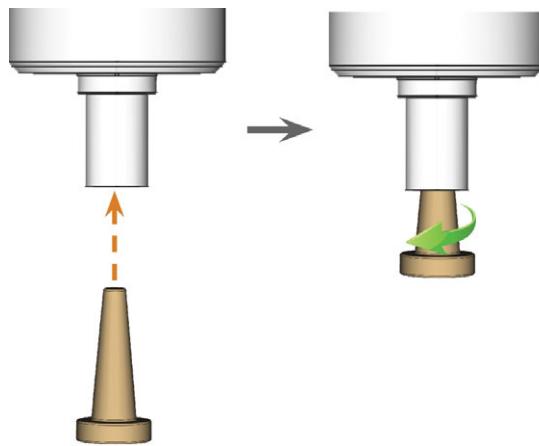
CLEANING THE INNER CONE OF THE SPINDLE
